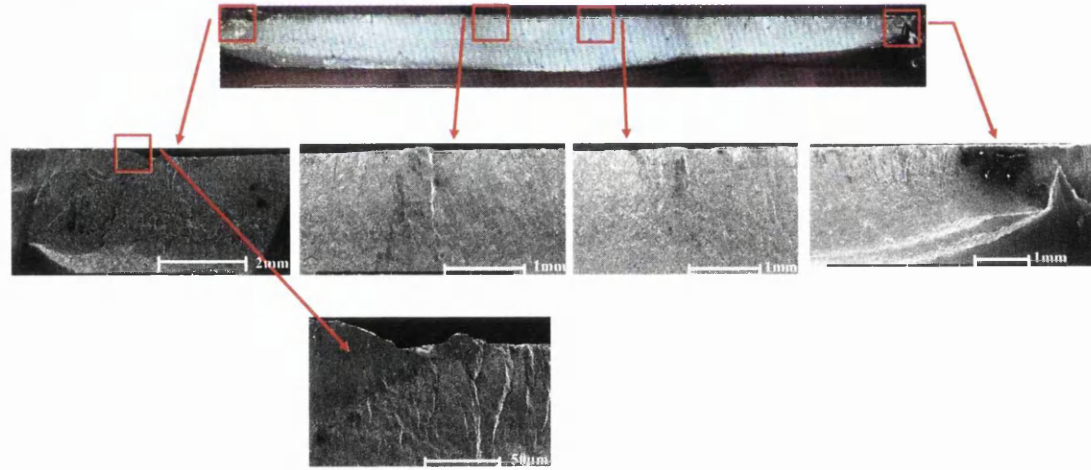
Typical Weld Throat Failure – Sheet View, GM1
